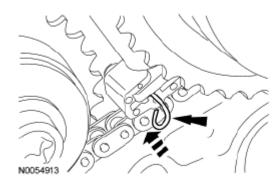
Locating LH Secondary Timing Chain Tensioner Bolt Courtesy of FORD MOTOR CO.
